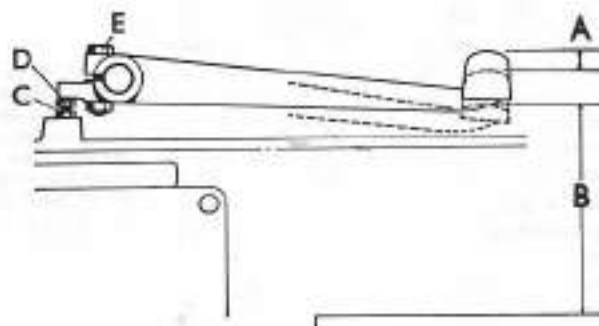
To adjust pedal free play on model 770, loosen lock nut (C) and adjust stop bolt (D) to obtain desired free play. Clutch wear may make repositioning lever on cross-shaft necessary; refer to text.
